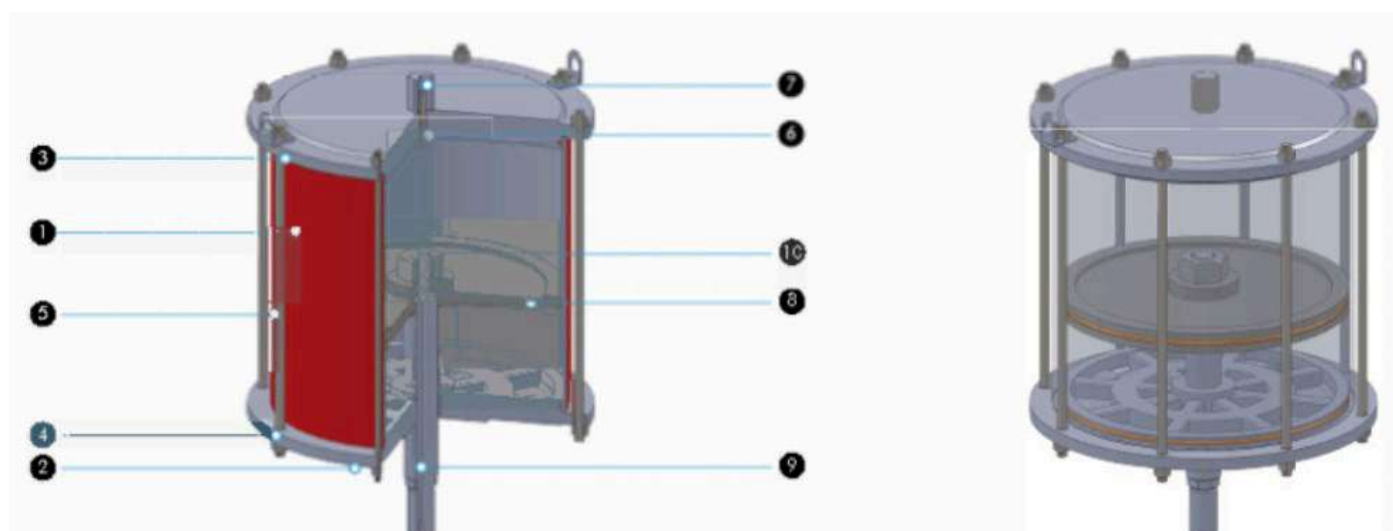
Ø280 to Ø1000 fabricated cylinder, sectioned and external views.
